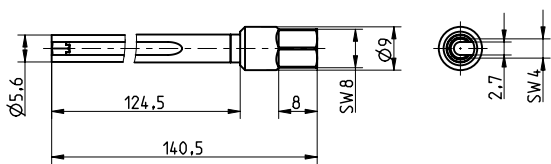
Mounting wrench ø5,6 mm, slotted, Type 1300B14
